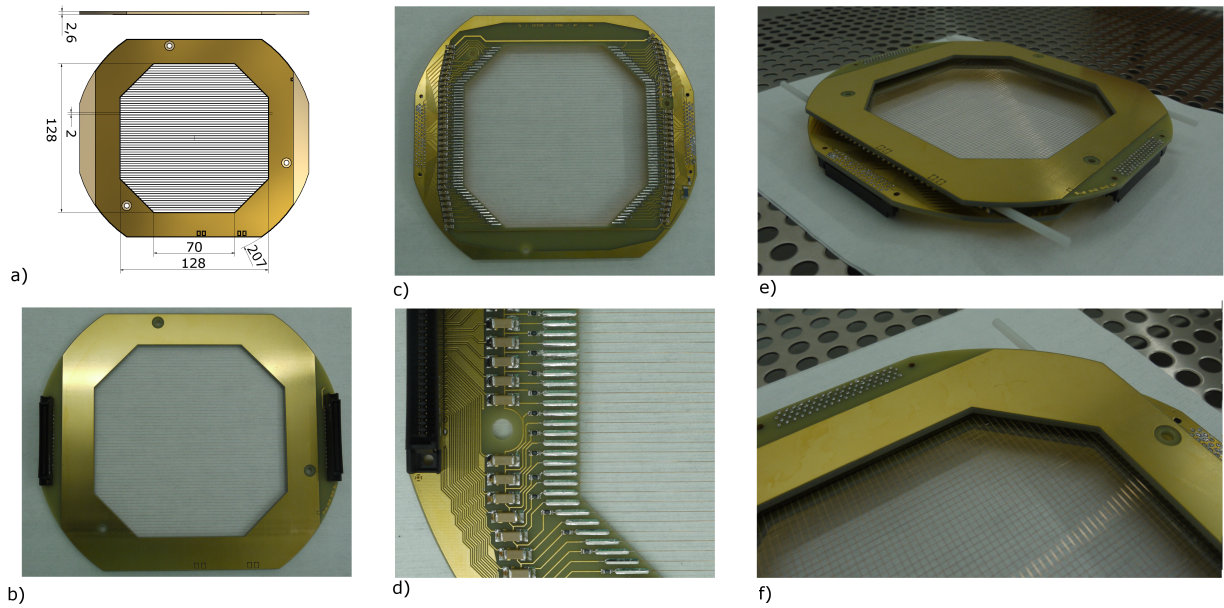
The wire planes of the charge-collection system. a) Technical drawing of the PCB (all dimensions in mm). b) The upper side of the wire plane. On the side, two black connectors are mounted. c) The lower side of the wire plane. d) A zoom of the lower side. The decoupling capacitors and the coupling resistors are shown. e) The two wire planes stacked on each other. f) The wires from the two planes are oriented orthogonally to each other.
